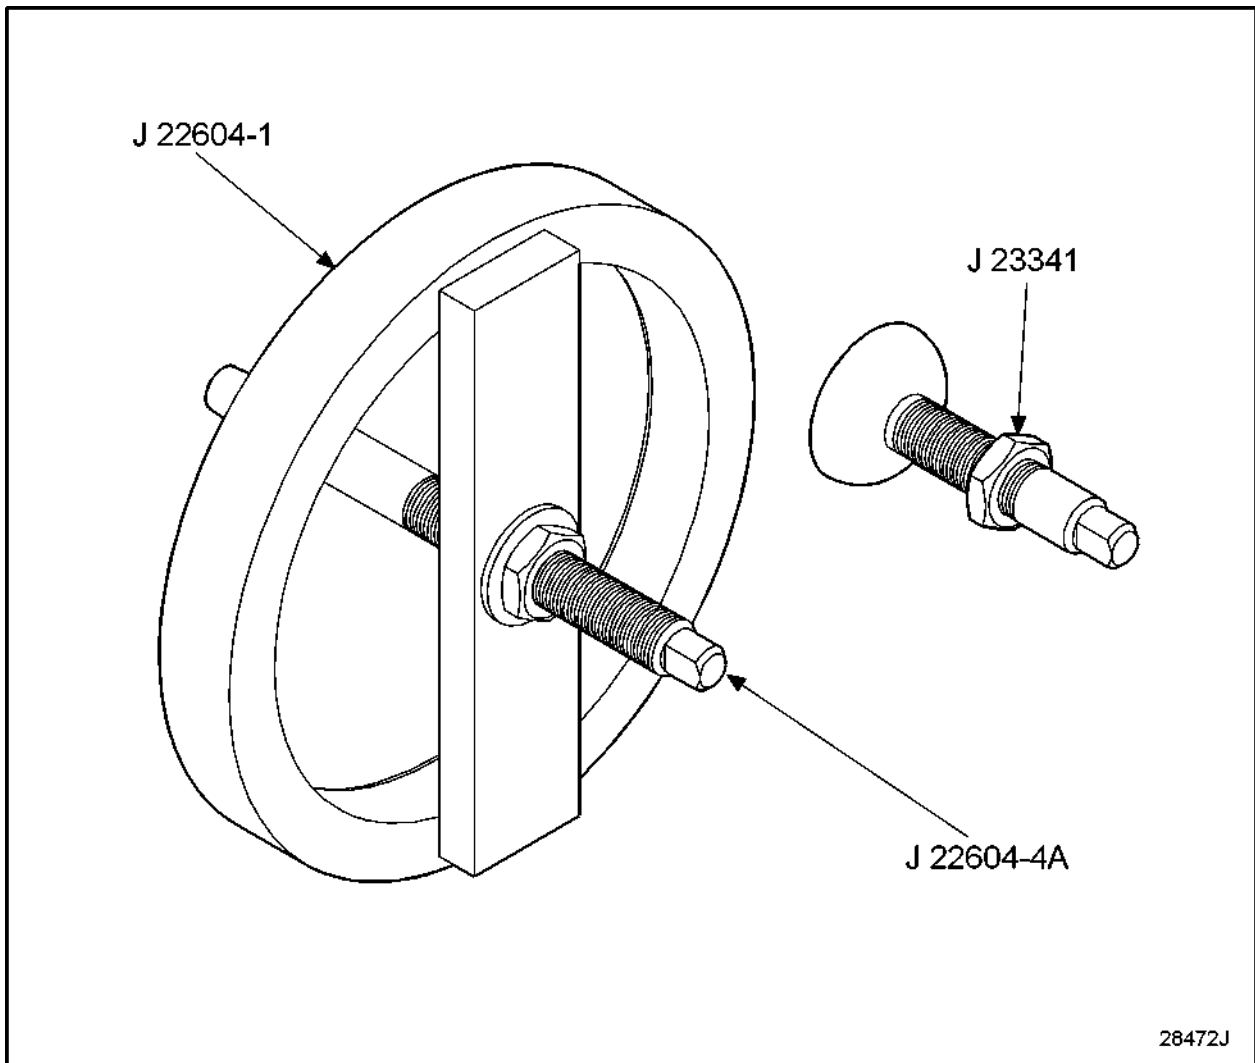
Rear Seal Insert (STD SL) Cup PLG REM,J 22604-B
